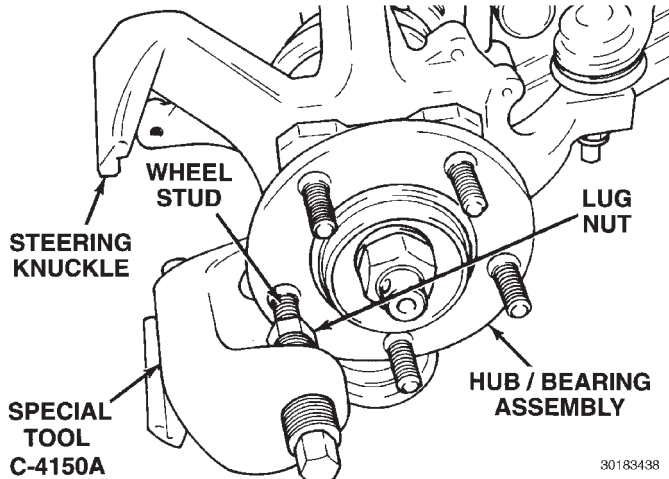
Wheel Stud Removal From Hub/Bearing Assembly
